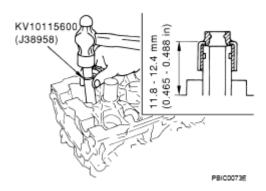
Installing Valve Oil Seal Courtesy of NISSAN MOTOR CO., U.S.A.
